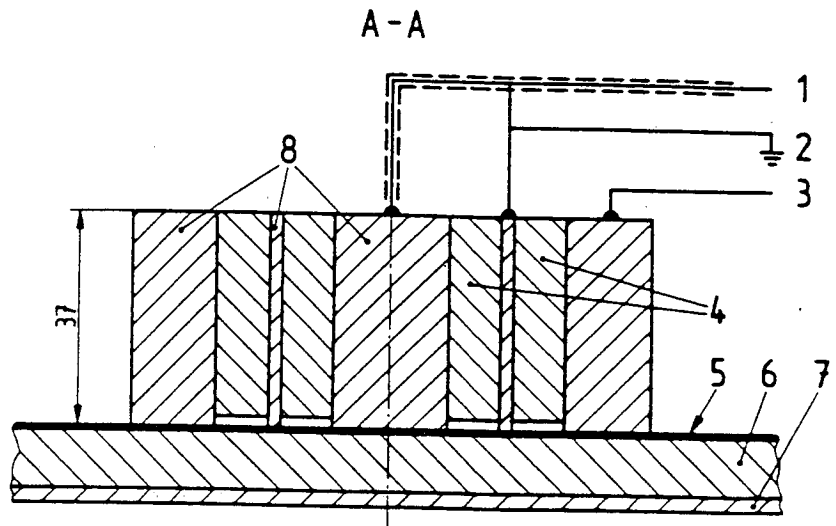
Assembly, dimensions and measuring circuit of electrodes Type A
